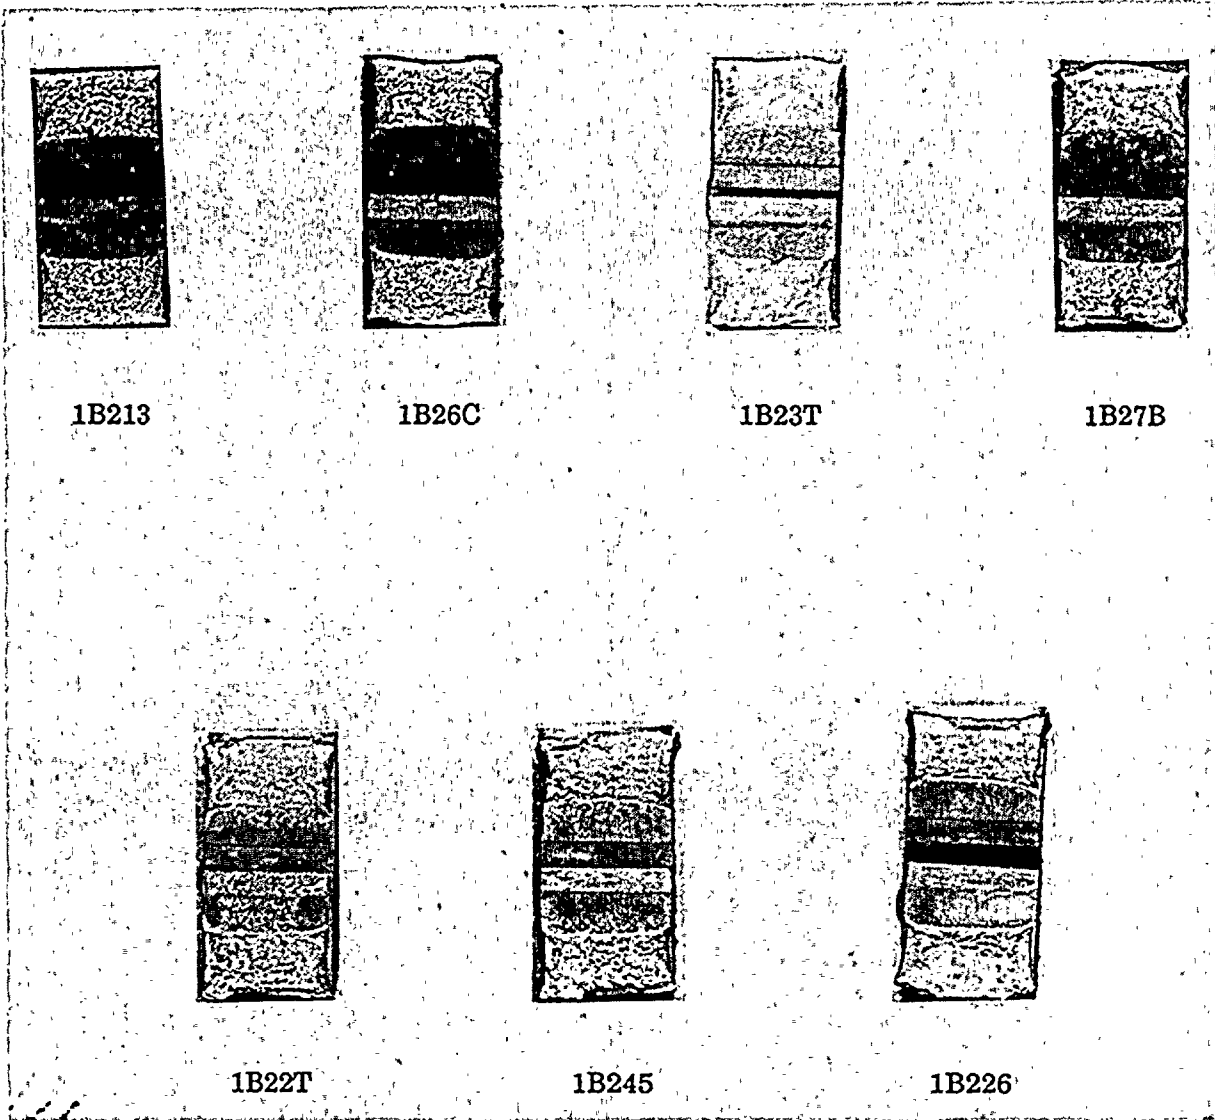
Precracked Charpy Impact Specimen Fracture Surfaces for Palo Verde Unit
